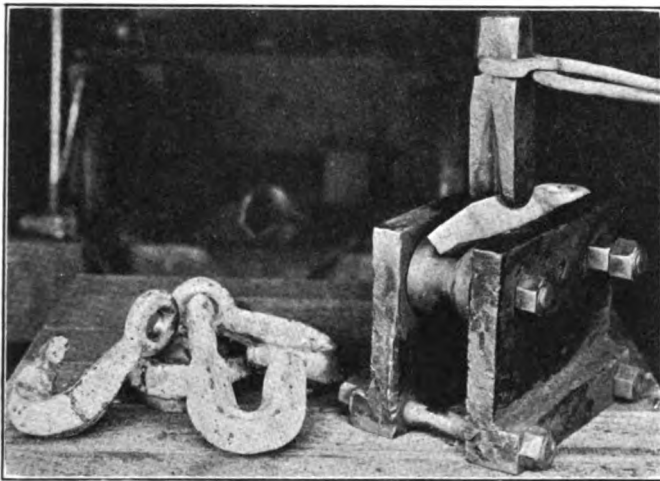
Formers for shaping wrecking chain hooks on a steam hammer
